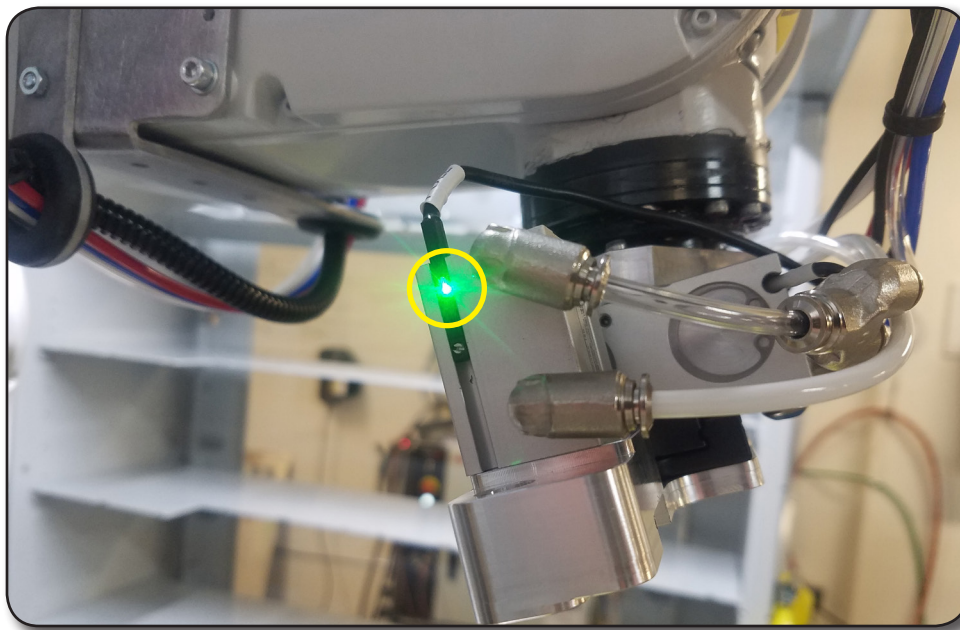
ILLUMINATED PULL CYLINDER SENSOR
